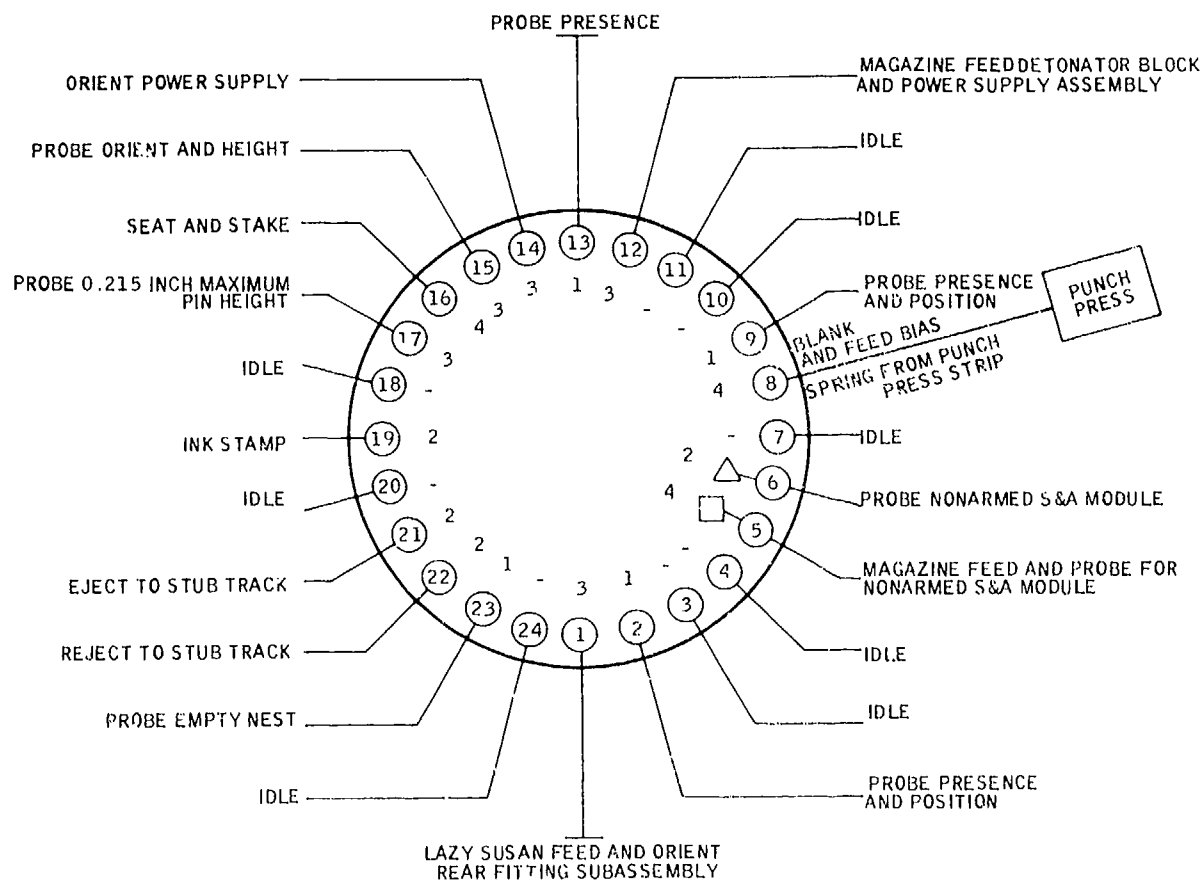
Dial schematic, machine F4 - rear fitting assembly operation 2
